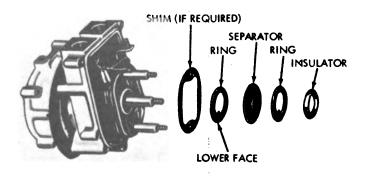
Slipring box disassembly or assembly (3 of 7).
